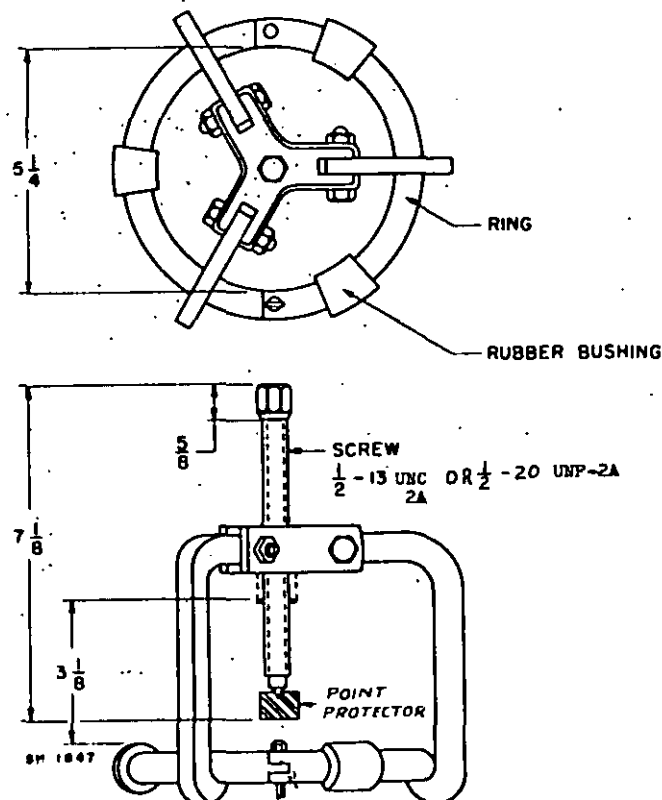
Type VI, puller, mechanical, ring type steering-wheel, three-arm.
